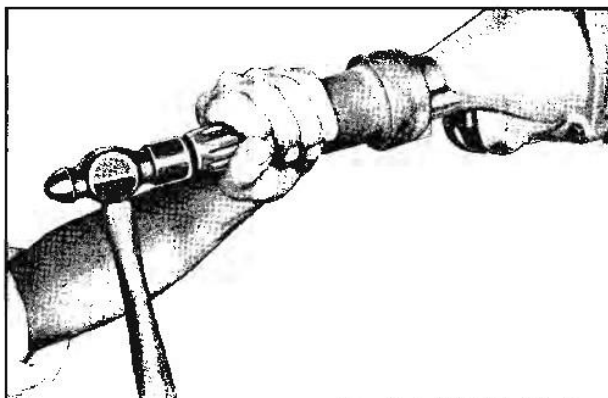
B-31 Installing Rear Bearing Retainer Oil Seal
